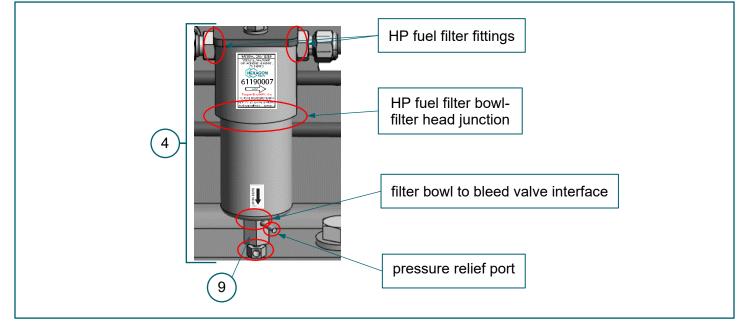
Apply Swagelok[®] Snoop[®] to (4) HP fuel filter assembly and (8) bleed valve at locations circled
